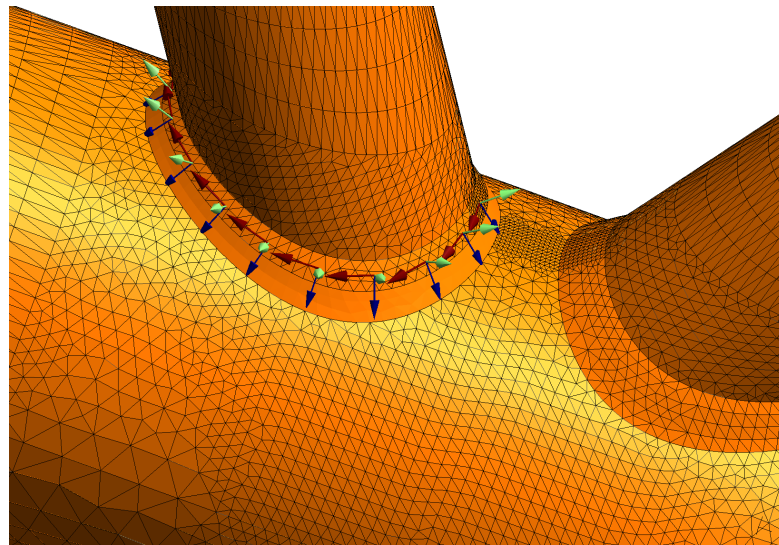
Weld torch trajectory for the third weld pass. The triads depict the pass of the weld torch along the weld line. The normal-to-surface vector (colored light green) shows the torch direction.
